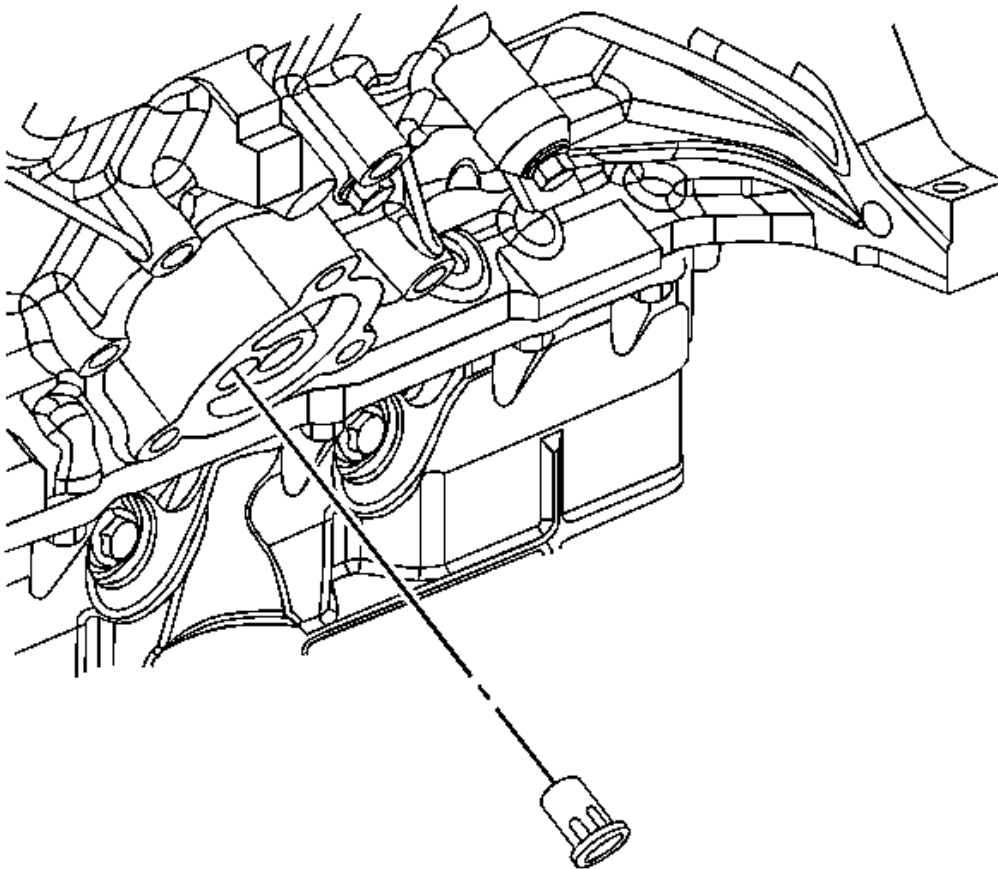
Locating Oil Filter Bypass Hole & Bypass Valve
